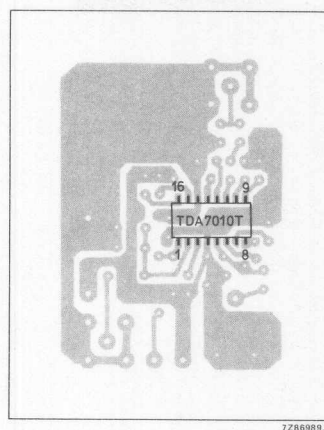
Track side of printed-circuit board used for the circuit of Fig. 4.
